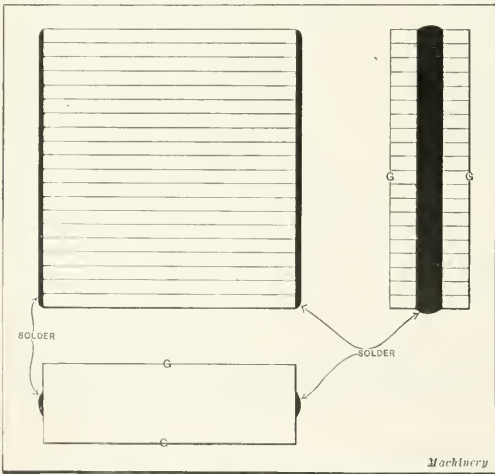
Method of holding a Number of Strips with Solder while grinding Edges
